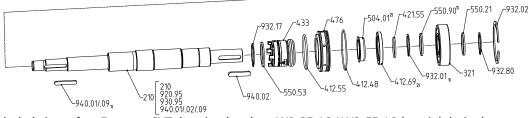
Exploded view of an Etanorm SYT, bearing brackets WS\_35\_LS / WS\_55\_LS (special design)
